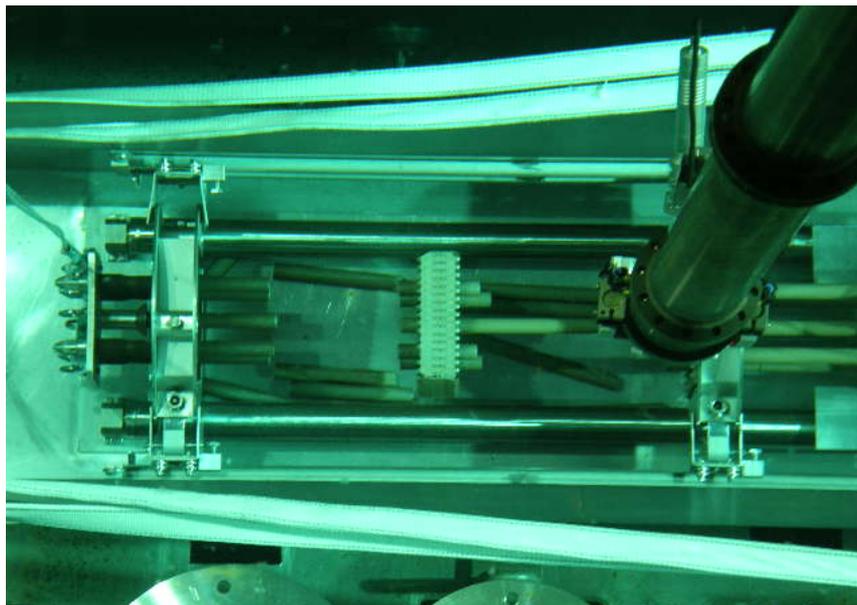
Cutting machine to cut the guide thimbles and instrumentation tubes simultaneously at both sides of a grid using abrasive wheels.
